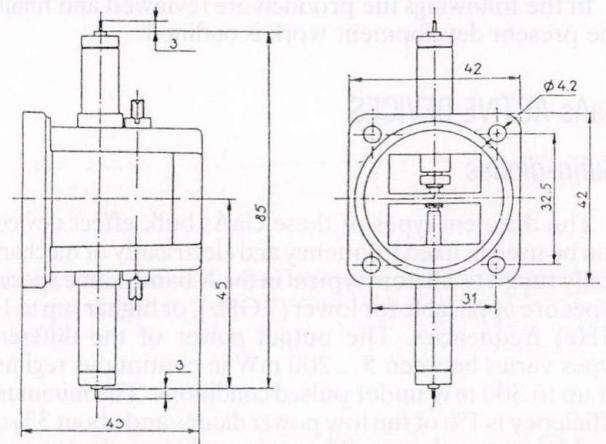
The outline of the DP-2 module containing the transmitter and receiver parts in combined mount
